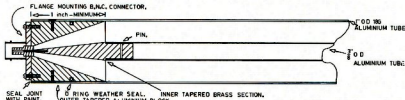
Assembly of BNC Flange Mounting Connector to Aluminium Tube.
